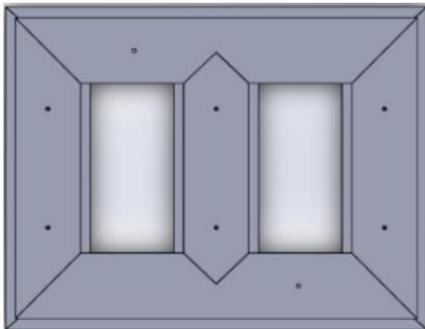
Surface view of 3-phase Transformer with solid stacks
